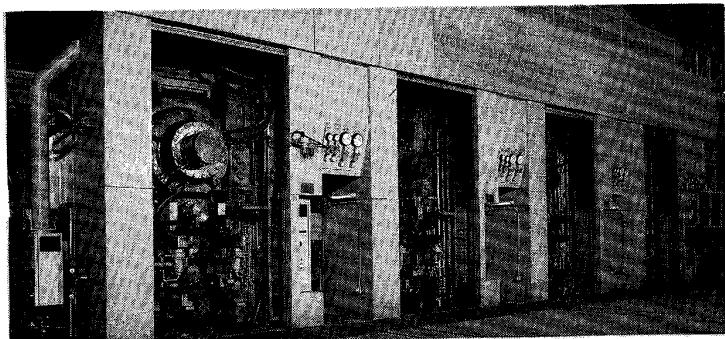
A tandem cold strip mill consisted of all HC-mill stands.
